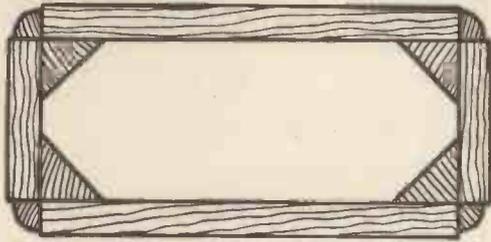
A Section through the body of the Clock showing the Corner Blocking Pieces.
